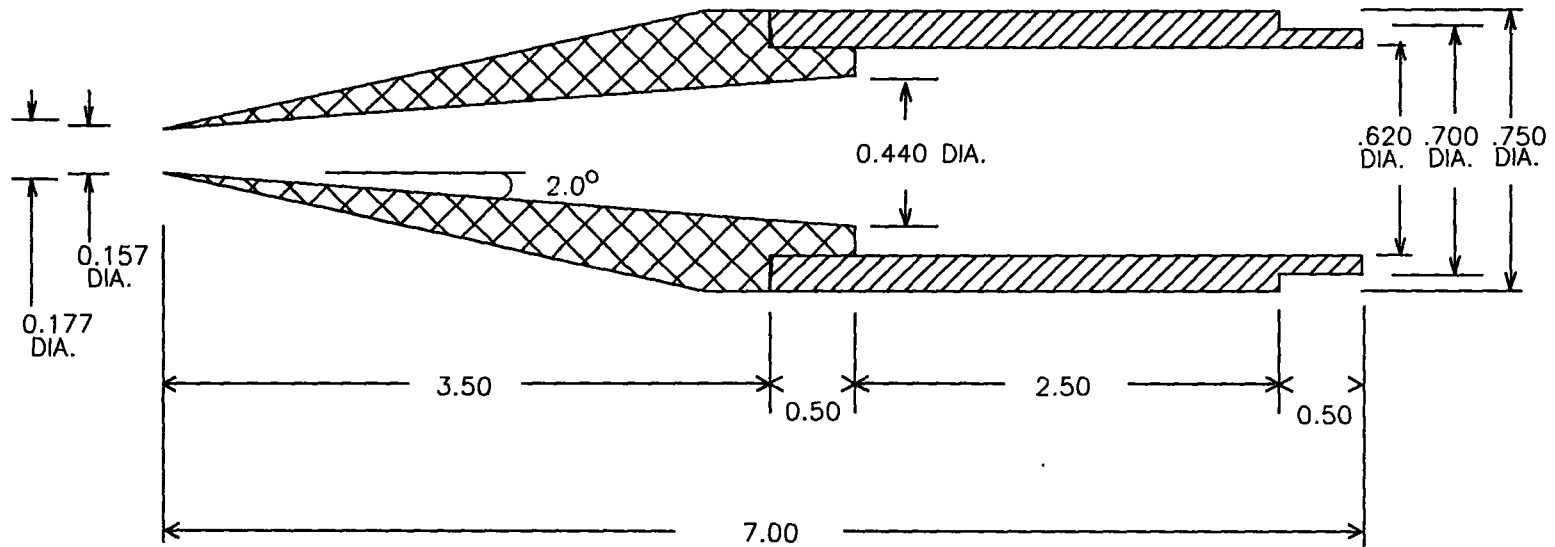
Detailed Drawing of McGregor 2 Probe.
